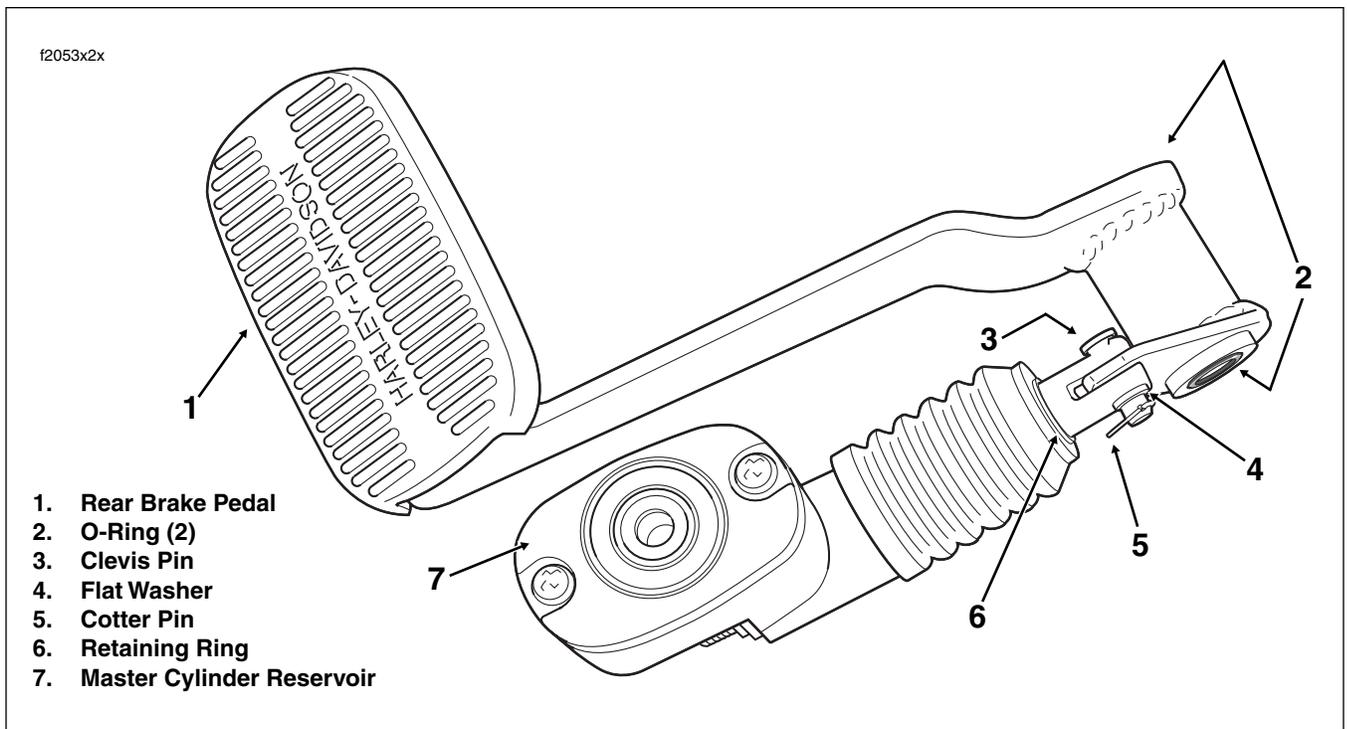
Rear Brake Pedal/Master Cylinder Assembly
